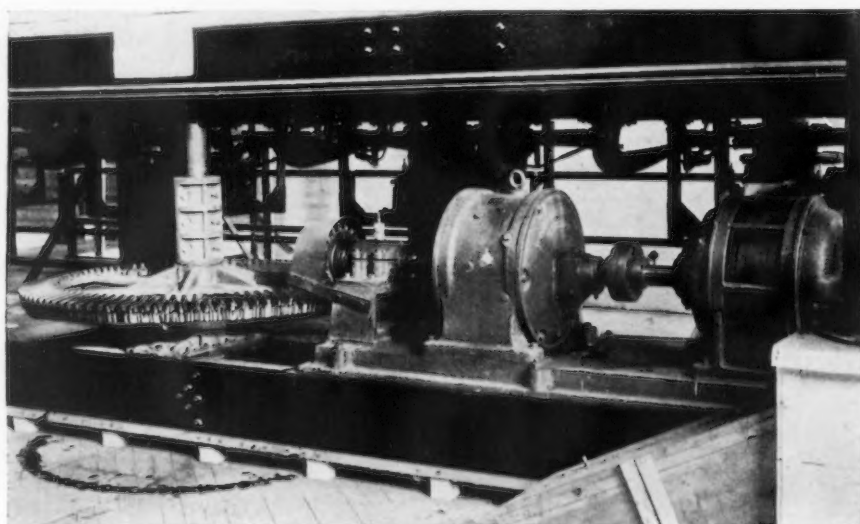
A slow speed vertical reducer unit in which a large bevel gear is employed on the vertical drive shaft.
